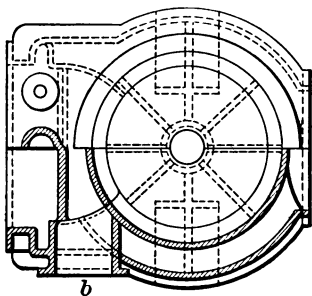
shows a plain view, Fig. 33 an elevation, and Fig. 34 a section of a casting designed for a low-pressure cylinder with receiver for a compound engine.
